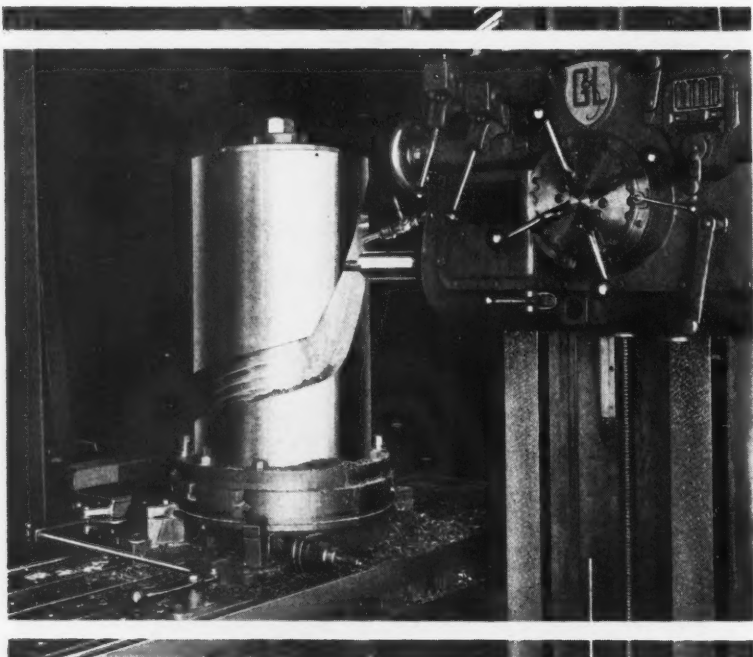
Milling a 5-inch Wide by 2-inch Deep Groove Entirely Around a Forging on a Giddings & Lewis Machine, Reducing the Machining Time to About One-third of that Formerly Required
